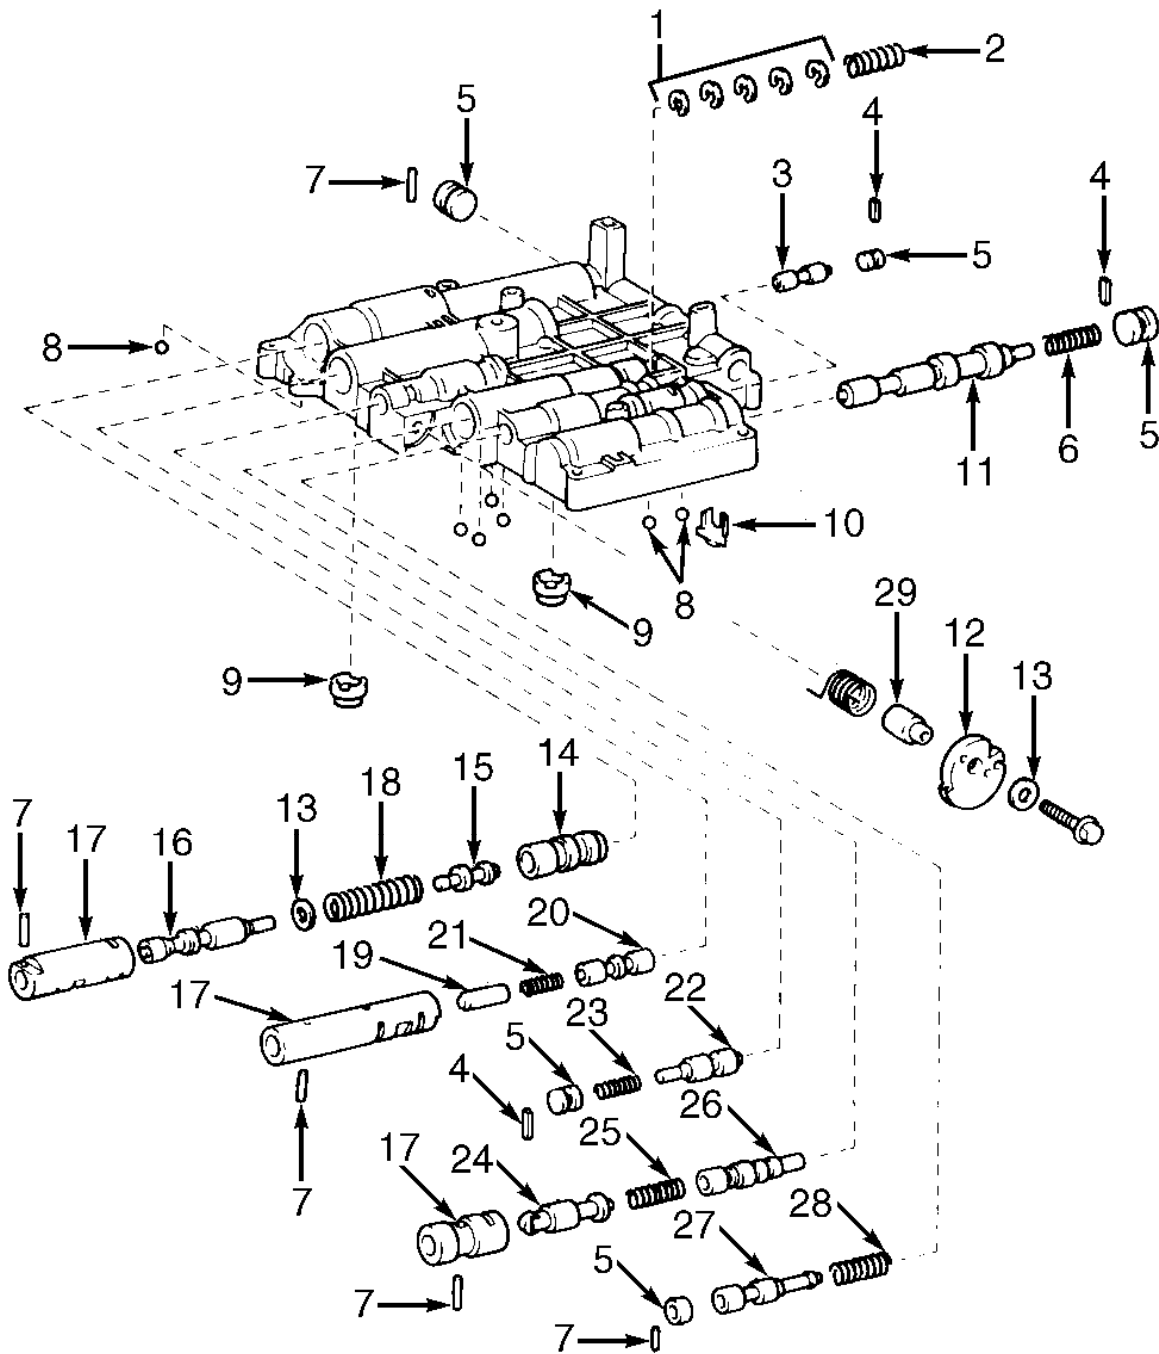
Exploded View Of A-245E & A-246E Valve Body Assembly
